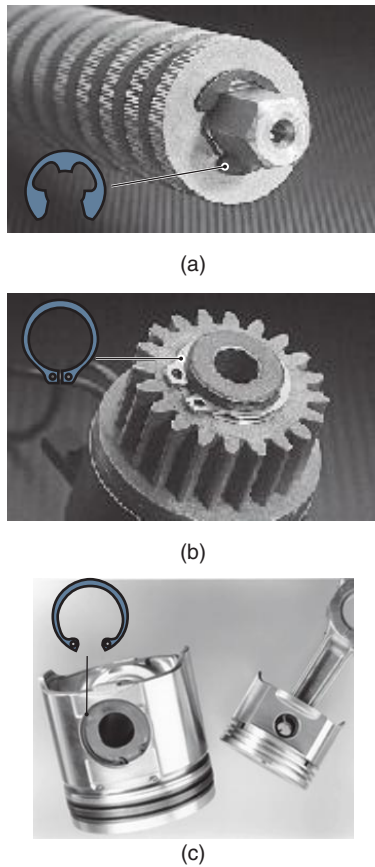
Examples of retaining rings. (a) An ME type snap ring, used to hold a series of cutters in place on a paper shredder shaft; (b) a general purpose MSH ring for locating a spur gear; (c) an internal retaining ring for securing a main piston bearing sleeve. *Source:* Courtesy of Rotor Clip Company, Inc.
